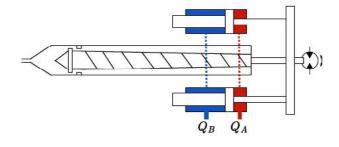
Sketch of injection unit and driving hydraulic cylinders.
